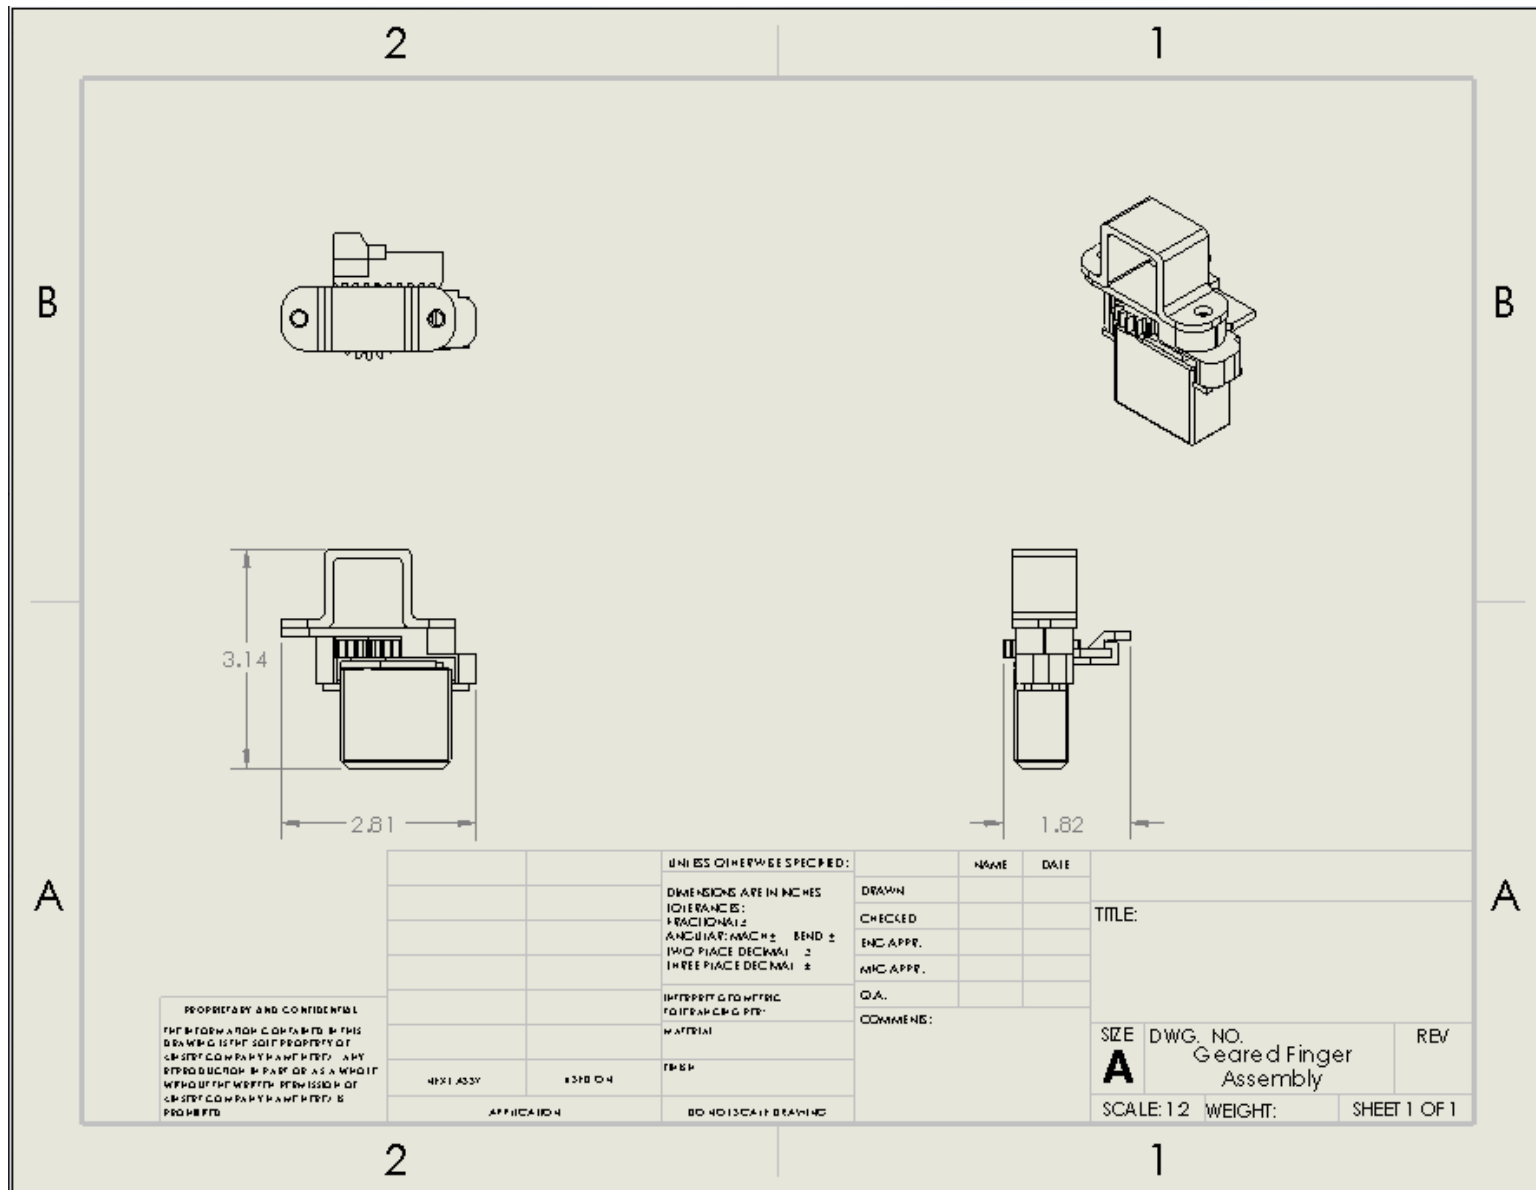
Final Finger Assembly of Shingling Robot Module (Attached to Lower Frame Module)
